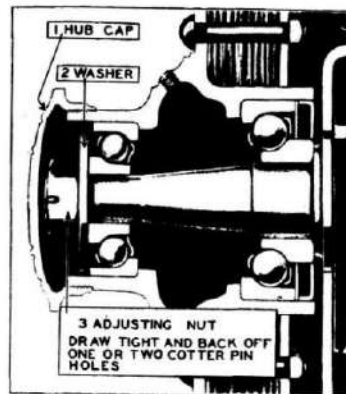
Front wheel bearings should be adjusted too loosely rather than too tightly.
